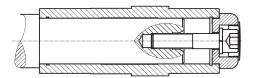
Gear unit mounted to shaft with a shoulder using the fastening element
